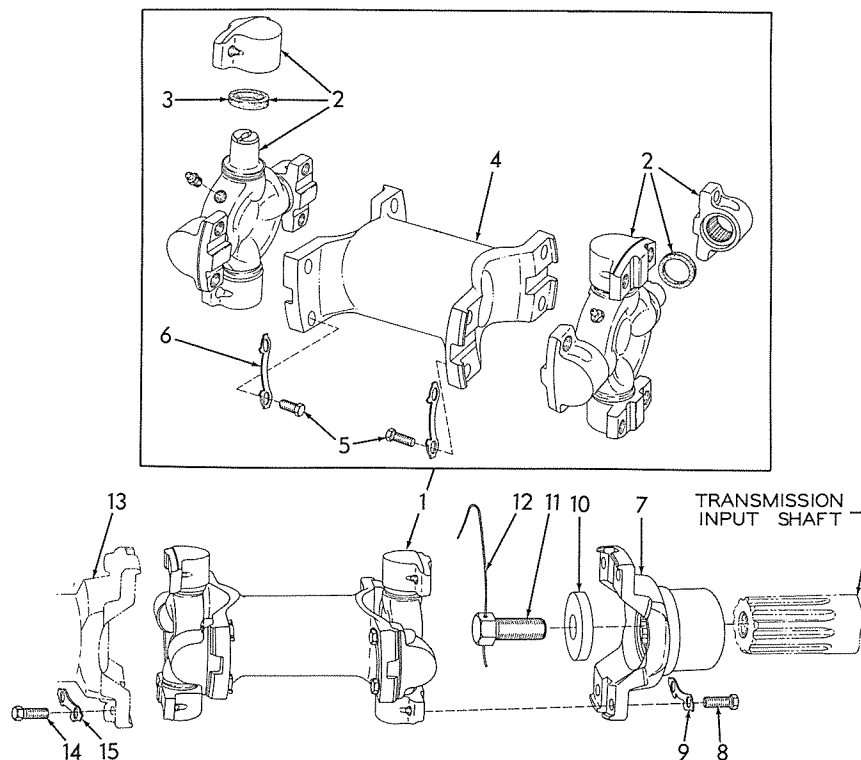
DRIVE SHAFT UNIVERSAL JOINT
